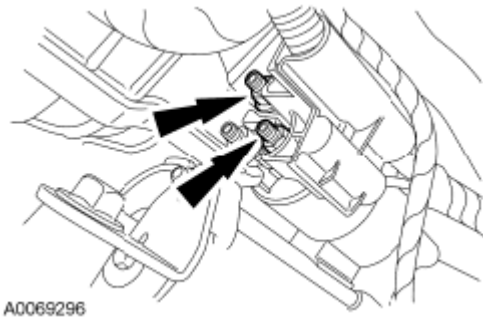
Locating Starter Motor Electrical Terminals Nuts
